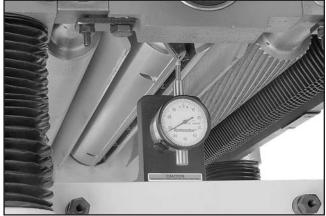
G1738 Rotacator™ Precision Planer Tool.
